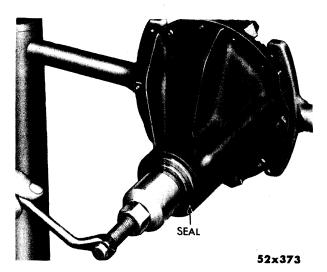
Removing Pinion Bearing Oil Seal (Puller C-748)
